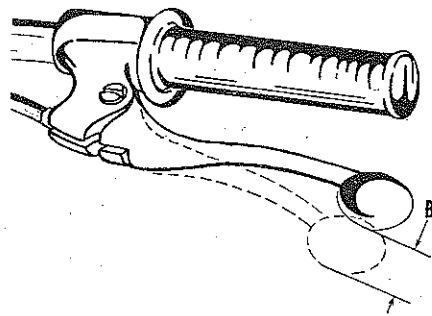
The clutch hand lever should have 1/16-in. play at B.
